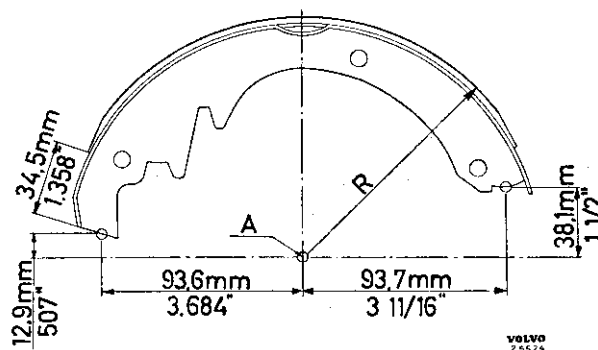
Adjusting measurements for brake shoe, rear wheel.
